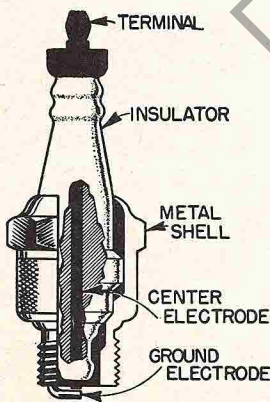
Cross sectional view of spark plug showing construction and nomenclature.
